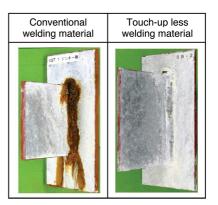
Accelerated corrosion test result of welded parts in Zn-11% Al-3% Mg-0.2% Si coated steel sheets (5% salt spray test, 1,000 h)
